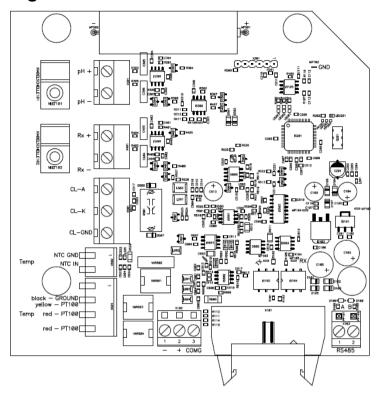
Sensors Card Drawing (pH-ORP-AMP-Tempr.Card)
